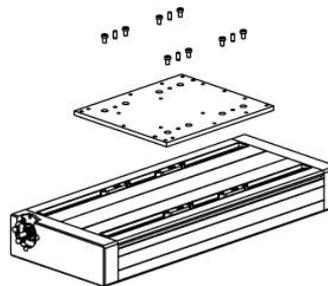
linear unit LES 4, 5, 6 for slide plate mounting
